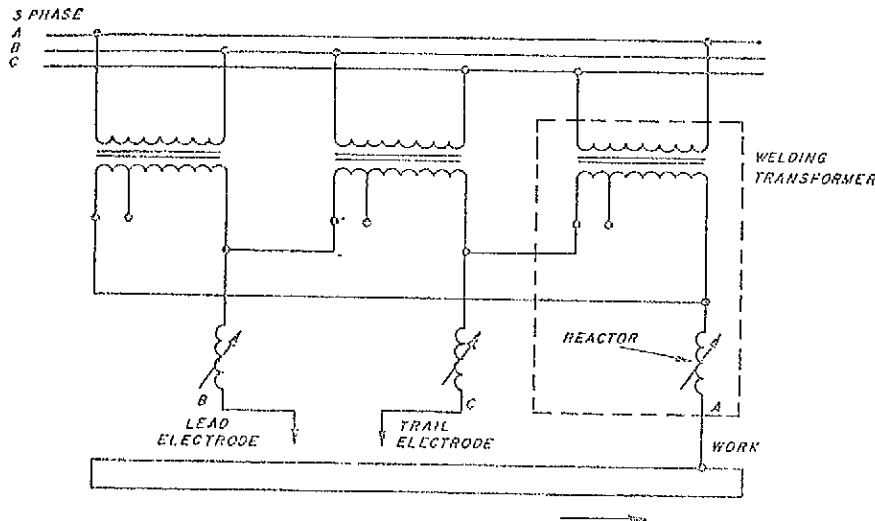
Alternating-current arc welding transformer connections for three-phase closed delta system
